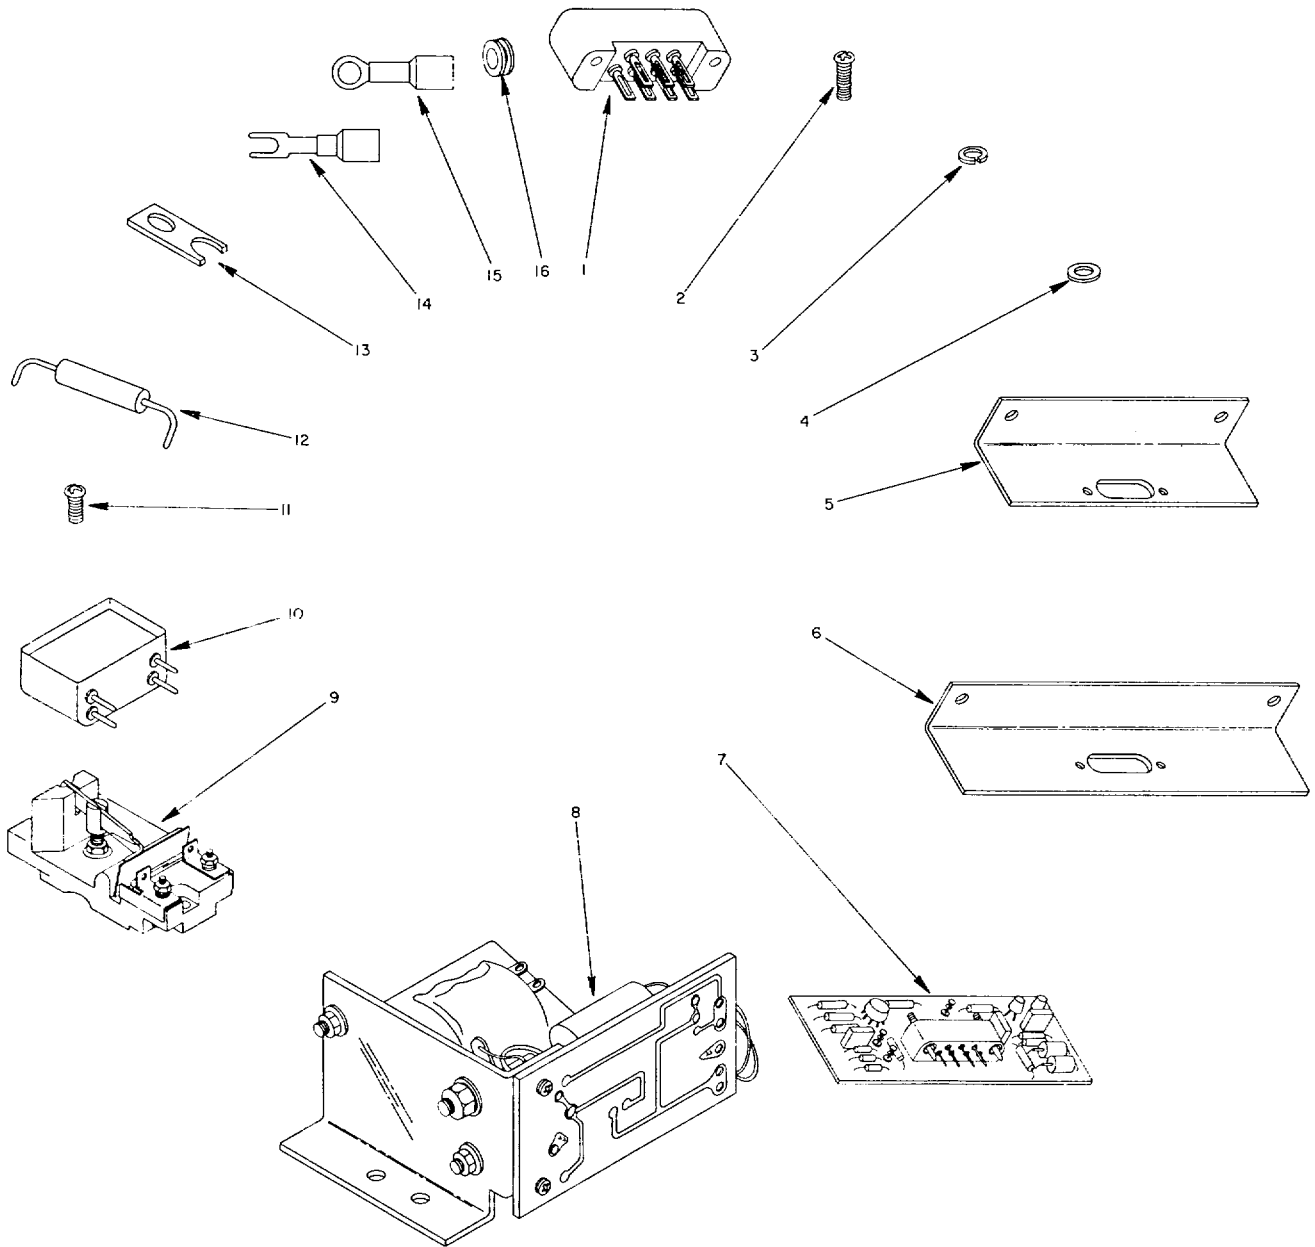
Parts unique to TT-702A/FG and TT-703A/FG.
